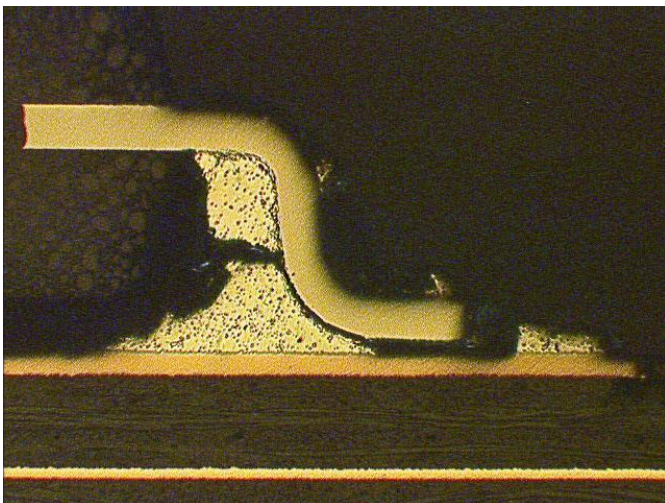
TSOP-50 Solder Joints, Board 103, Component U39, SN100C/SnPb, Failed @ 851 Cycles
